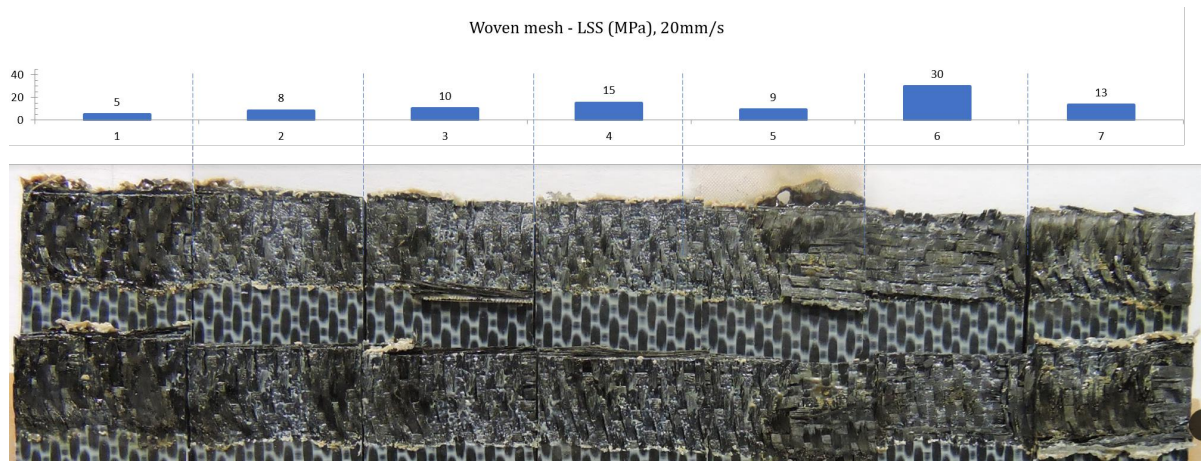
The fracture surfaces at a welding speed of 20mm/s
